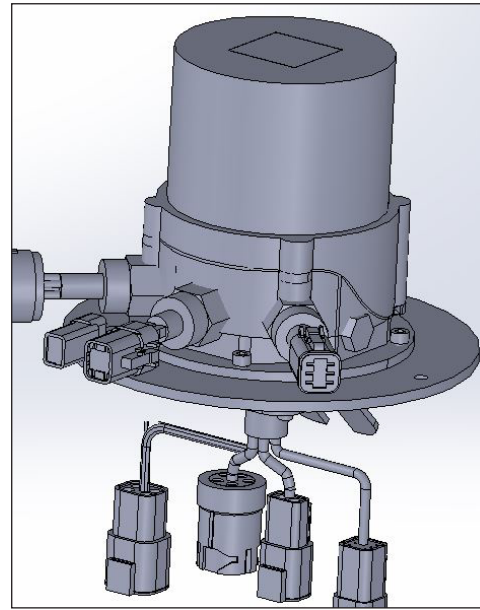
Slip Ring and Rotary Joint Assembly
